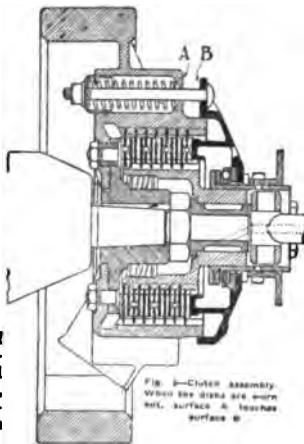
Clutch Assembly. When the disks are worn, surface A becomes surface B.
